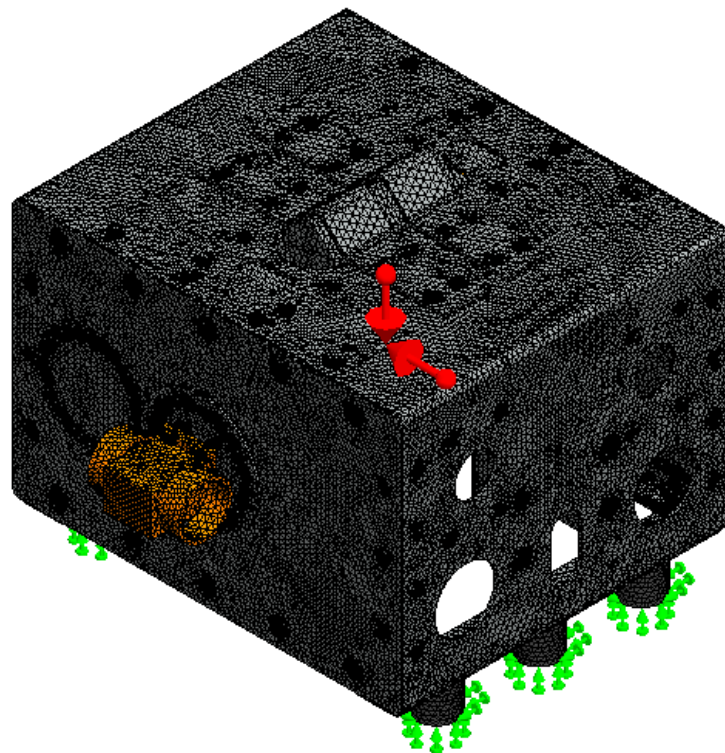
Representation of the meshed SOLIDWORKS® CAD model static load analysis where the steel cables exert force onto machine.
